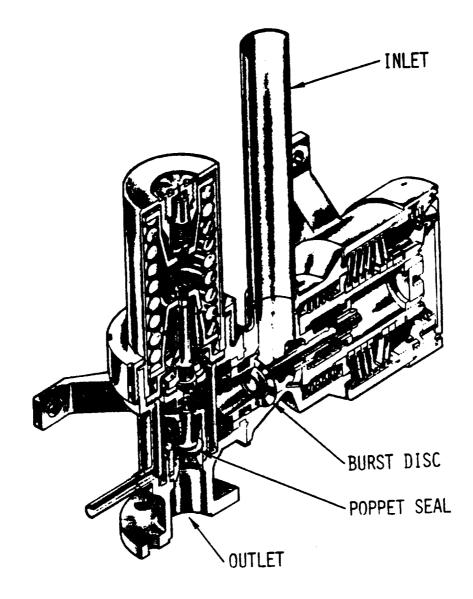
PRESSURE RELIEF VALVE ASSEMBLY
